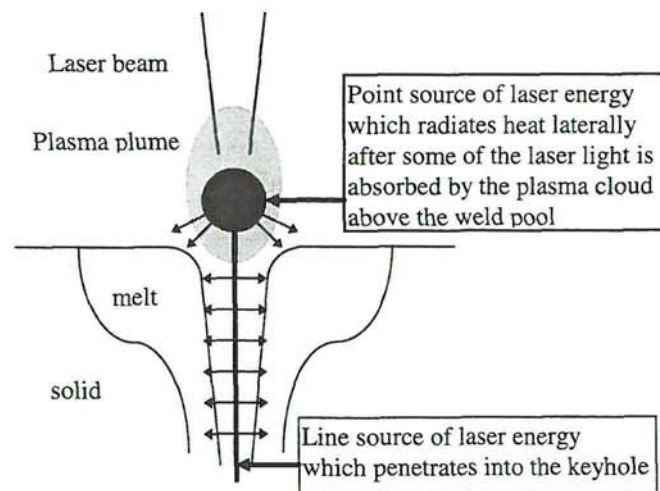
A schematic demonstrating the combined point and line source model of laser welding.
